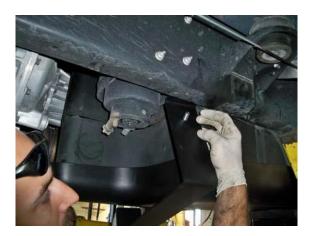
Using a hammer and punch, or screw driver to tighten the hold-down ring clockwise.
